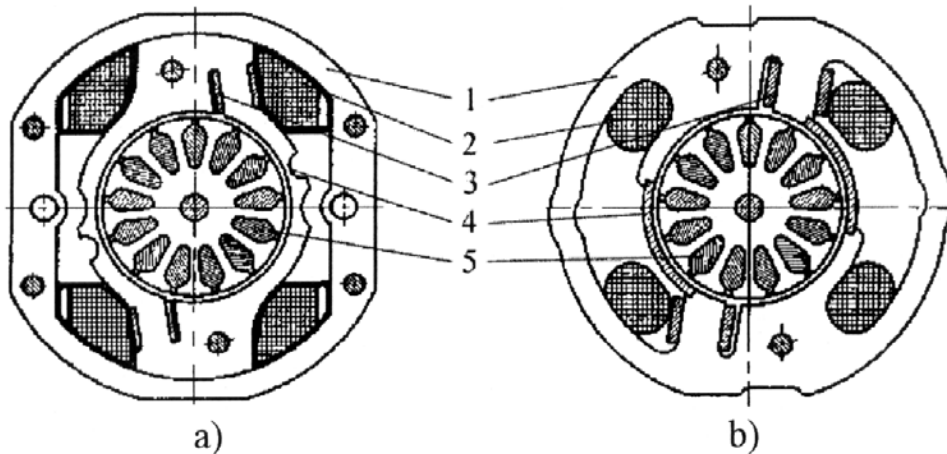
Cross-sections of a shaded-pole motors AD-2,5-30/E (a) and DAO62-2,5 (b): 1 - yoke of stator core; 2 - main winding; 3 - auxiliary winding; 4 - magnetic shunt; 5 - squirrel-cage
